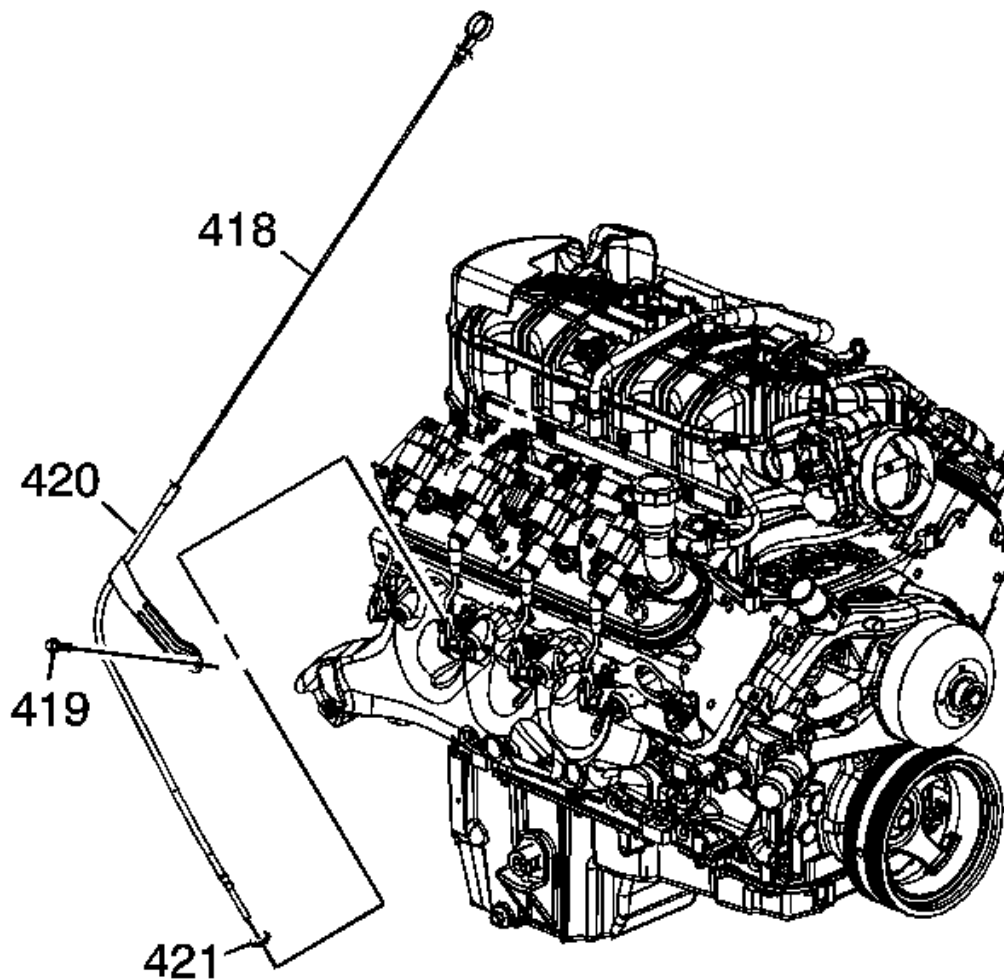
View Of Oil Level Indicator, Tube Bolt, Indicator Tube & O-Ring Seal
